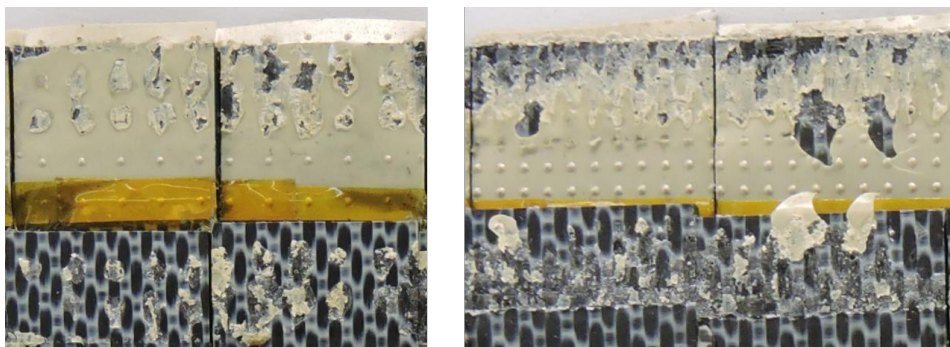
The fracture surfaces of Con5 (left) and Con2.5 (right) when welded at a speed of 25mm/s
